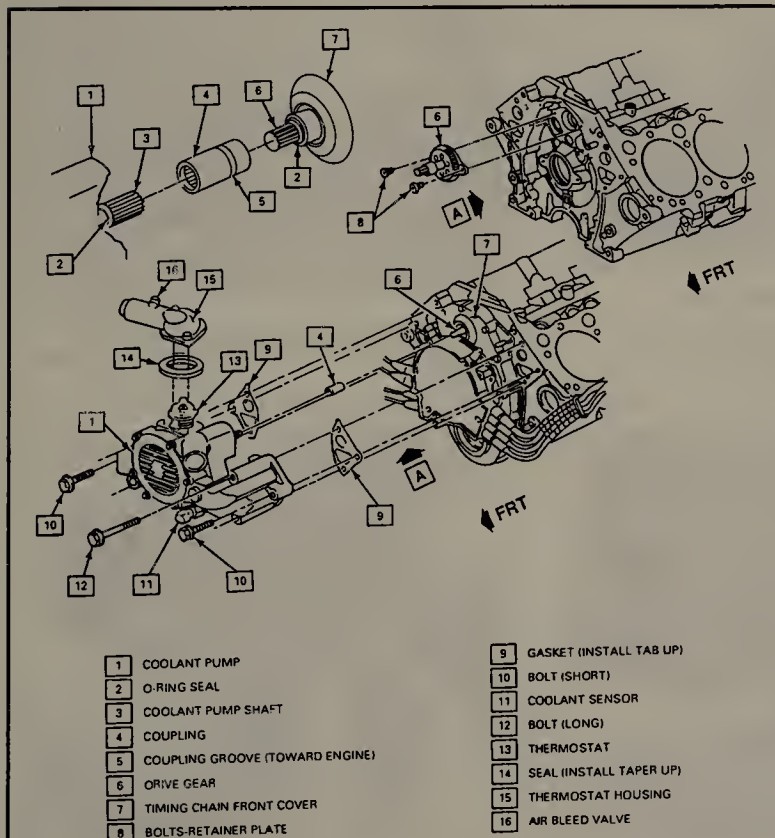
Exploded view of the water pump and related components—5.7L (VIN P and 5) engines
